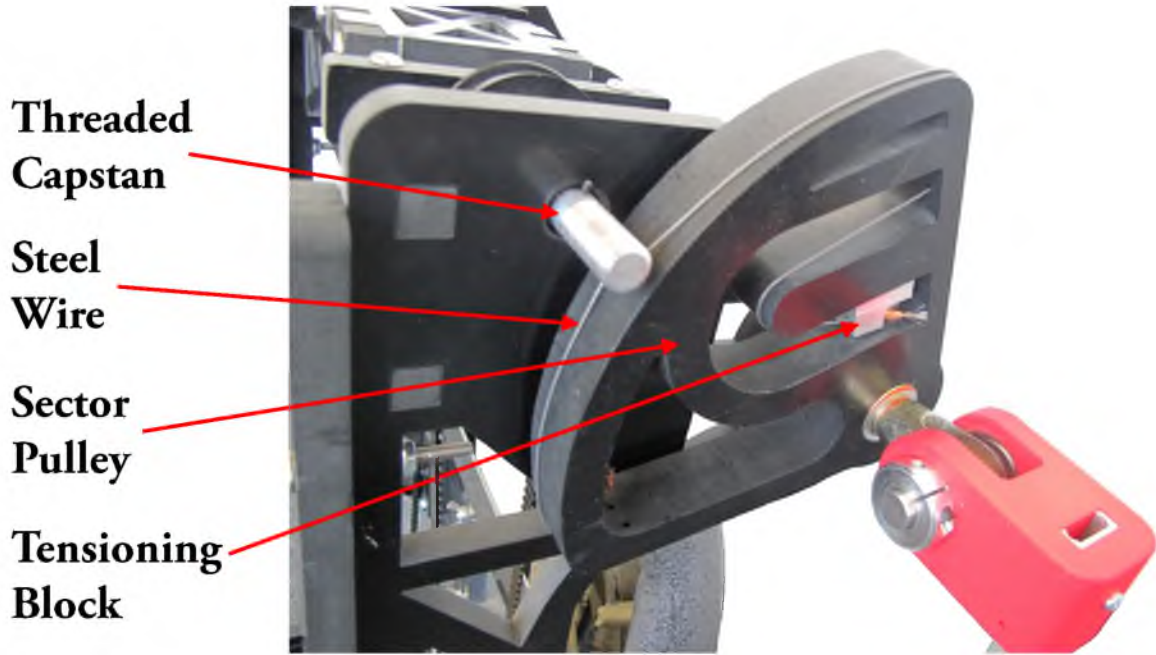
The capstan drive includes the threaded capstan, steel wire, sector pulley, and tensioning block.
